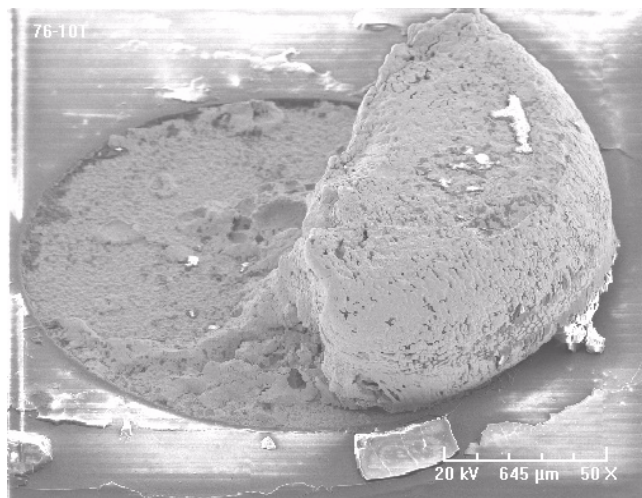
50X SEM image of fracture surface of drop test sample of SAC0.13Mn solder joint.
